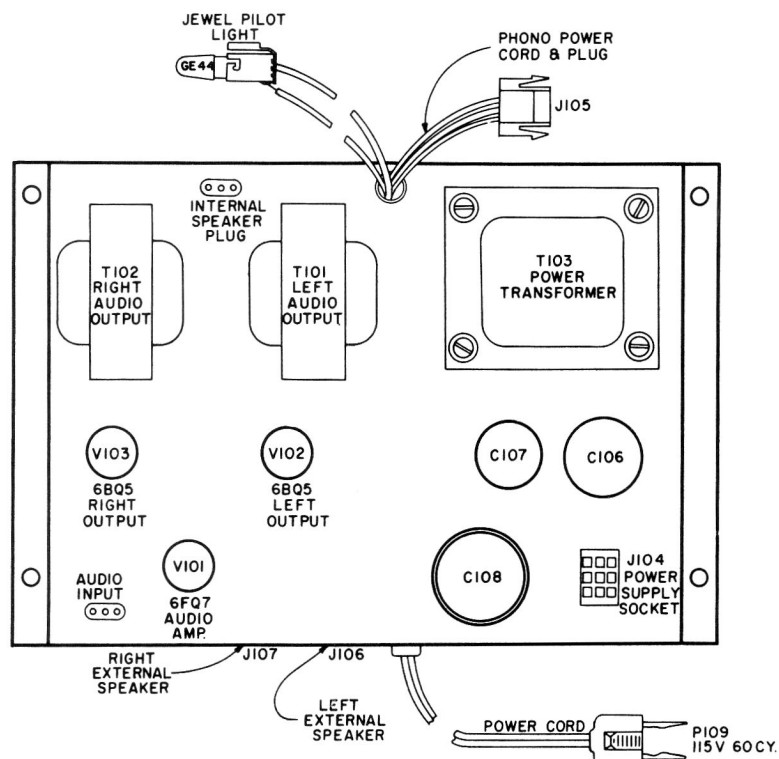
Power Amplifier Chassis Showing Location of Tubes and Major Components
